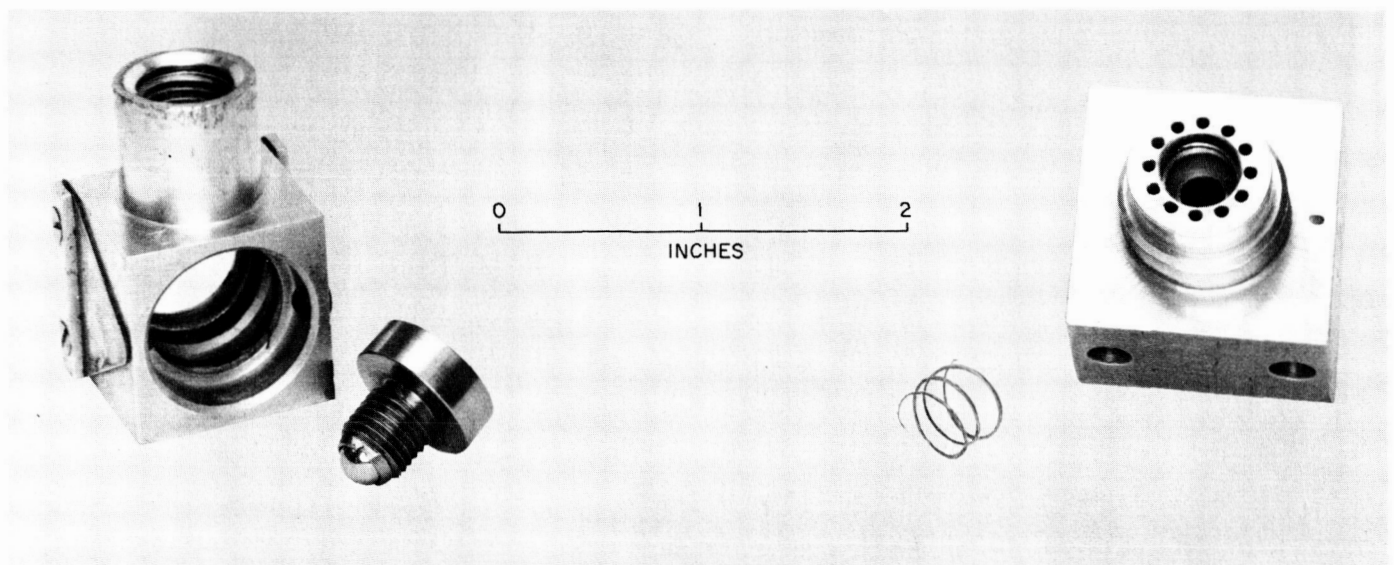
Ball fill-valve thread failure at 7200 psi during burst test with ground fitting engaged
